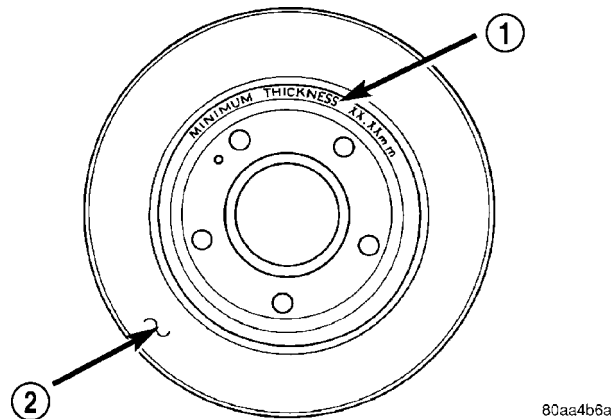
Minimum Brake Rotor Thickness Markings (Typical)
